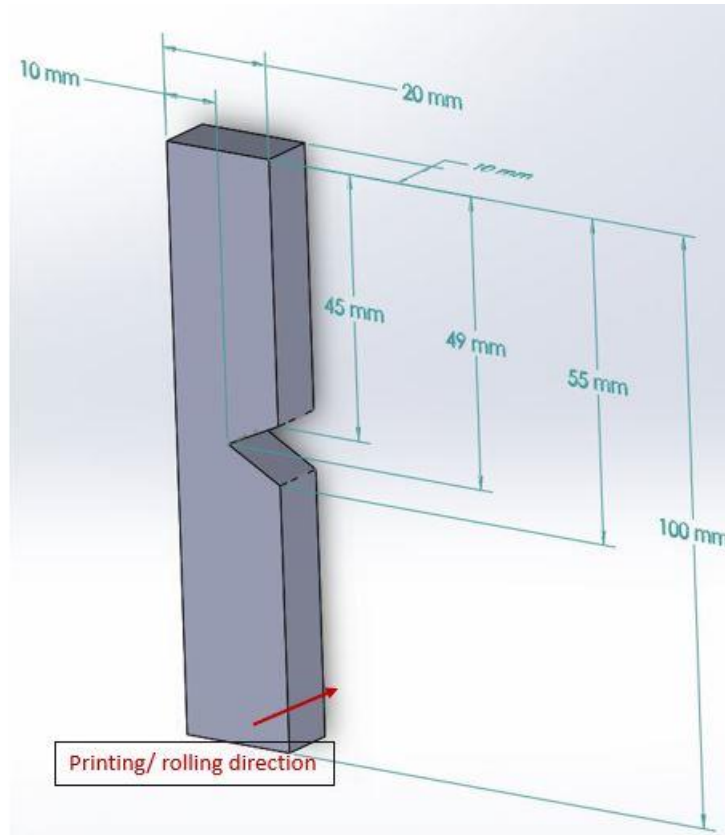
Illustration of 3D printed v-notch sample for 3 points bending fracture sample.
